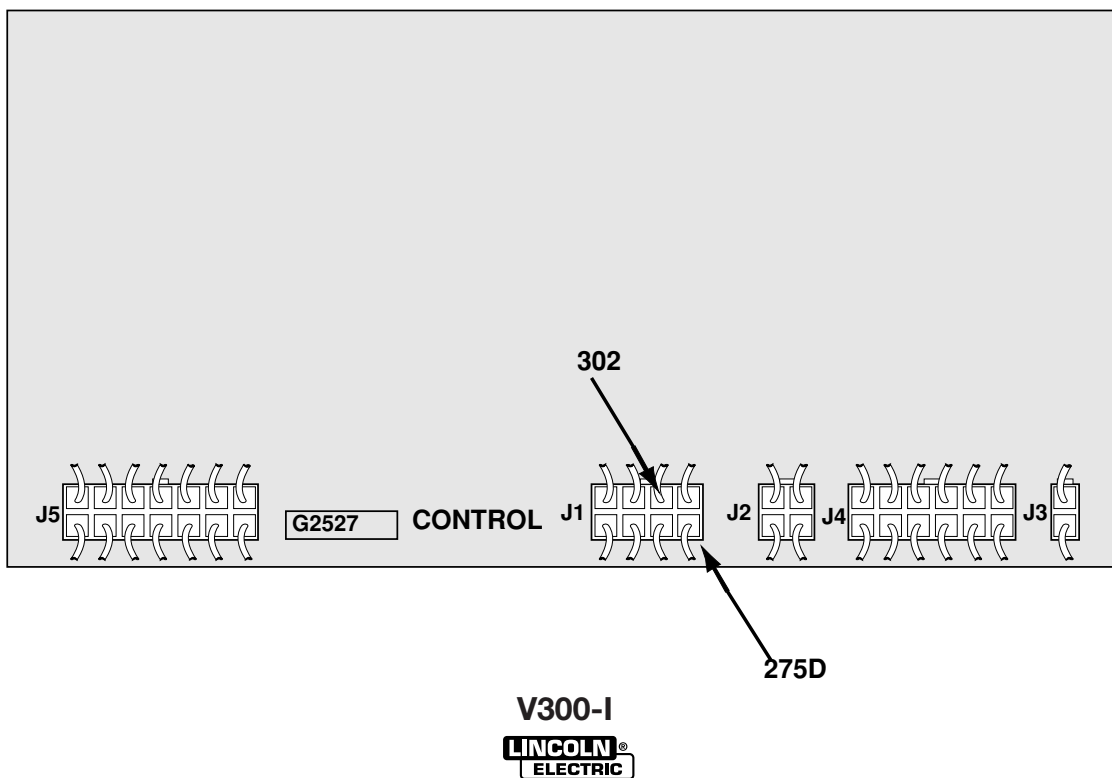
GETTING ACCESS TO CONTROL BOARD
